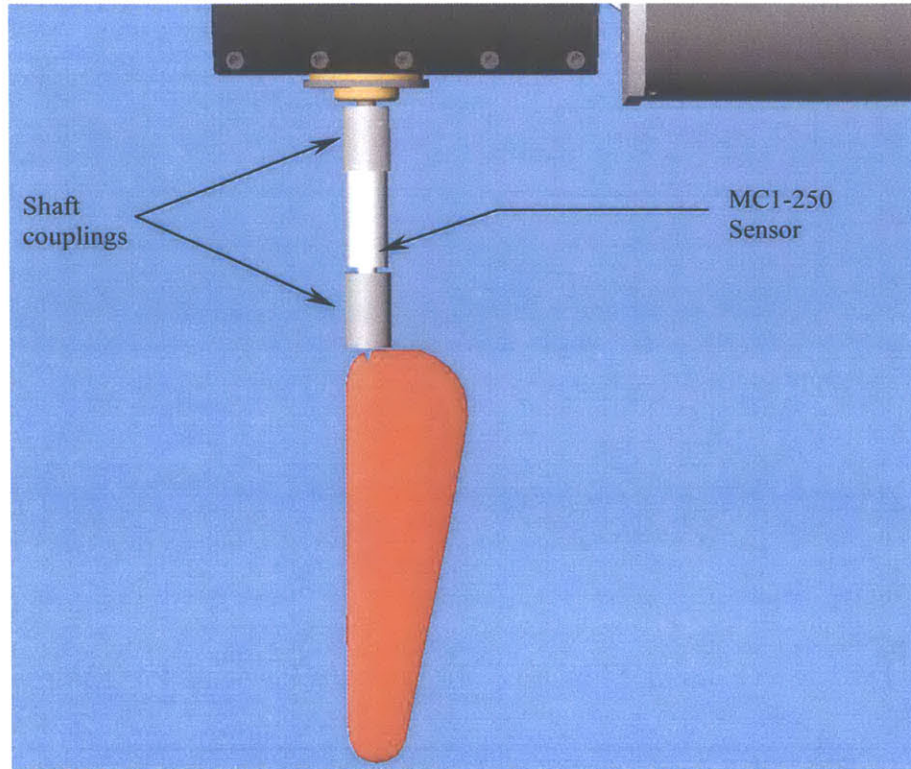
Solidworks drawing of 6-axes sensor assembly
